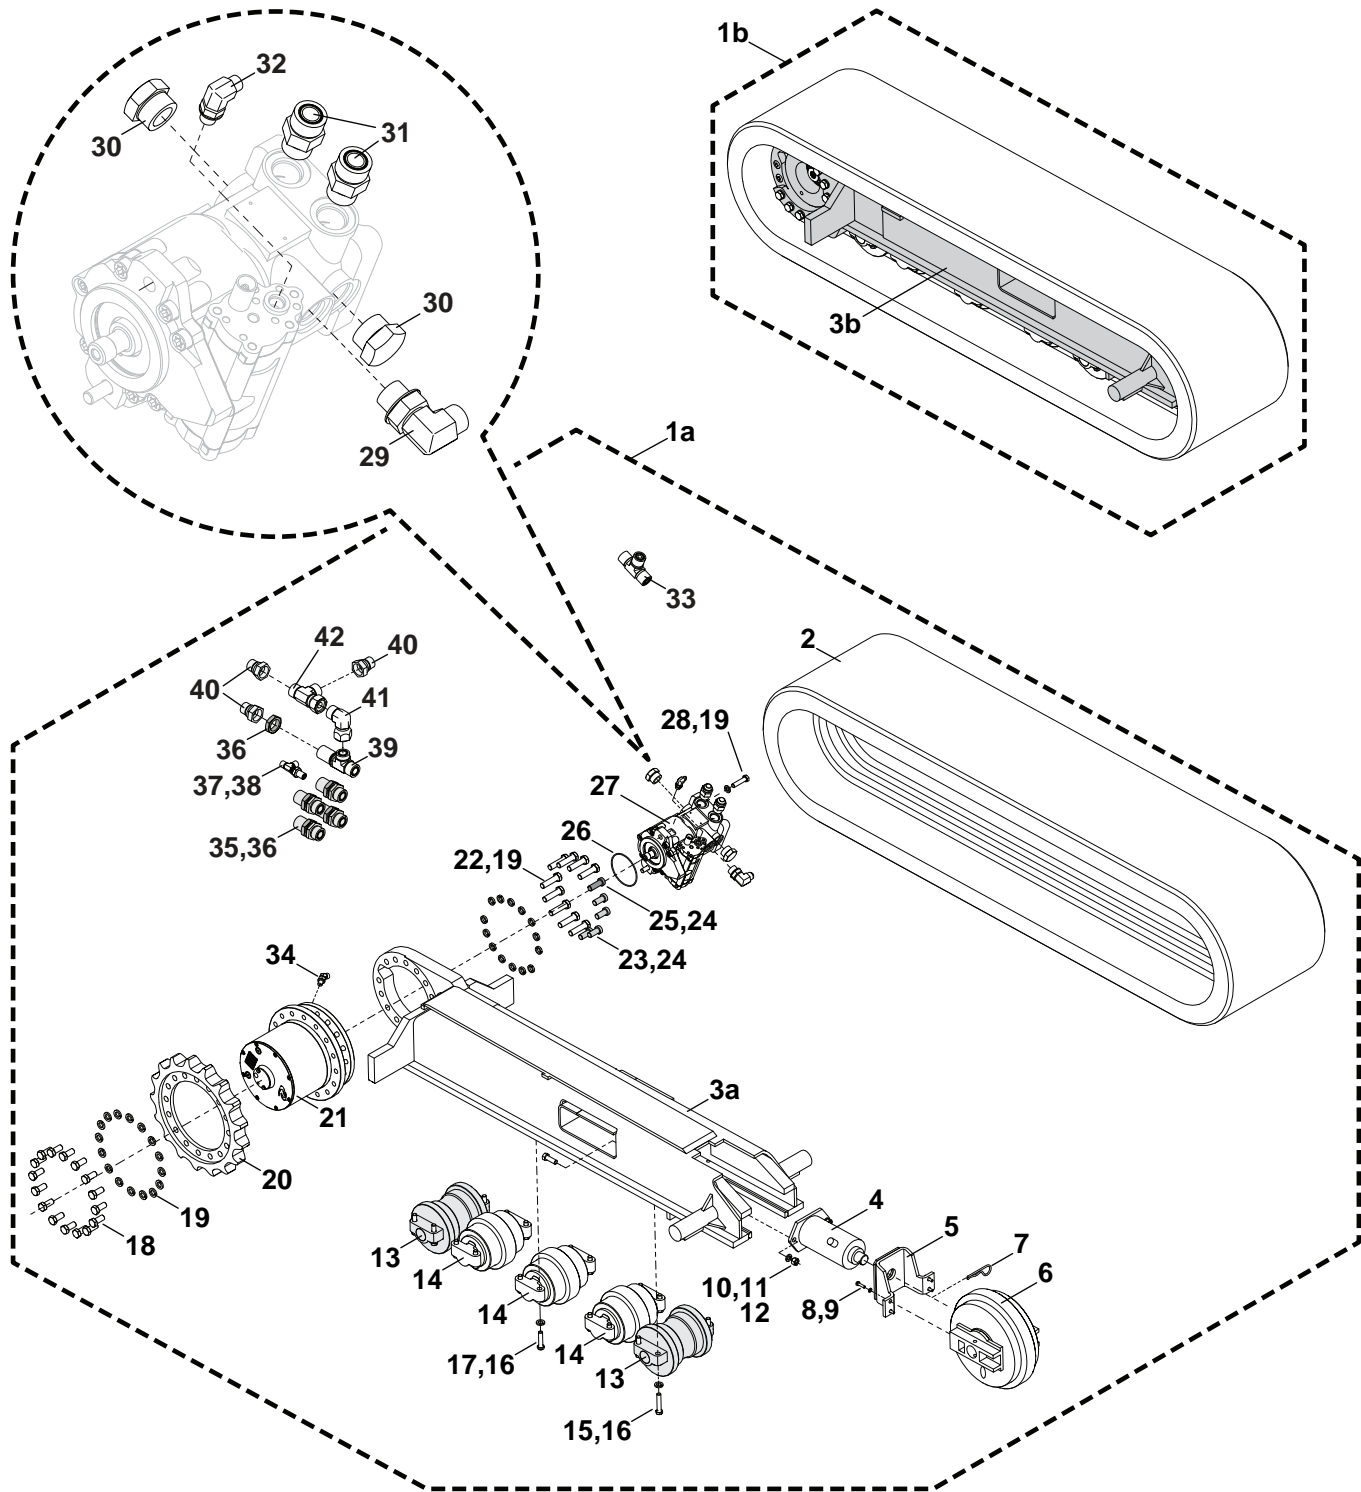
Drive Assembly - Continuous Rubber (2 of 2)
